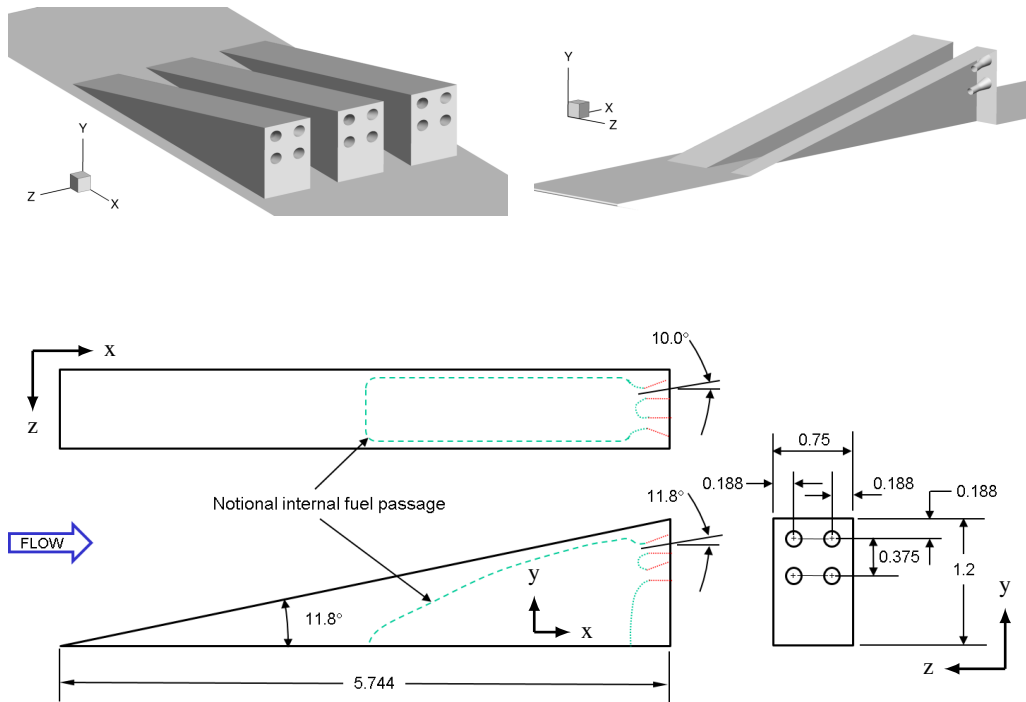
Isometric views and dimensional details of the baseline ramp injector (dimensions are in inches).
